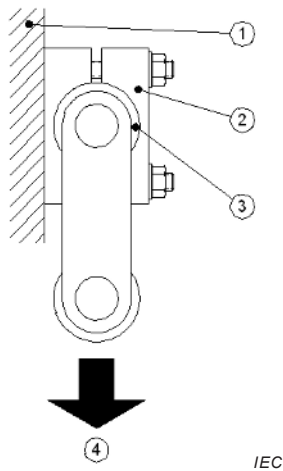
Lateral load test with load applied parallel to mounting surface on cleat with two fixings
